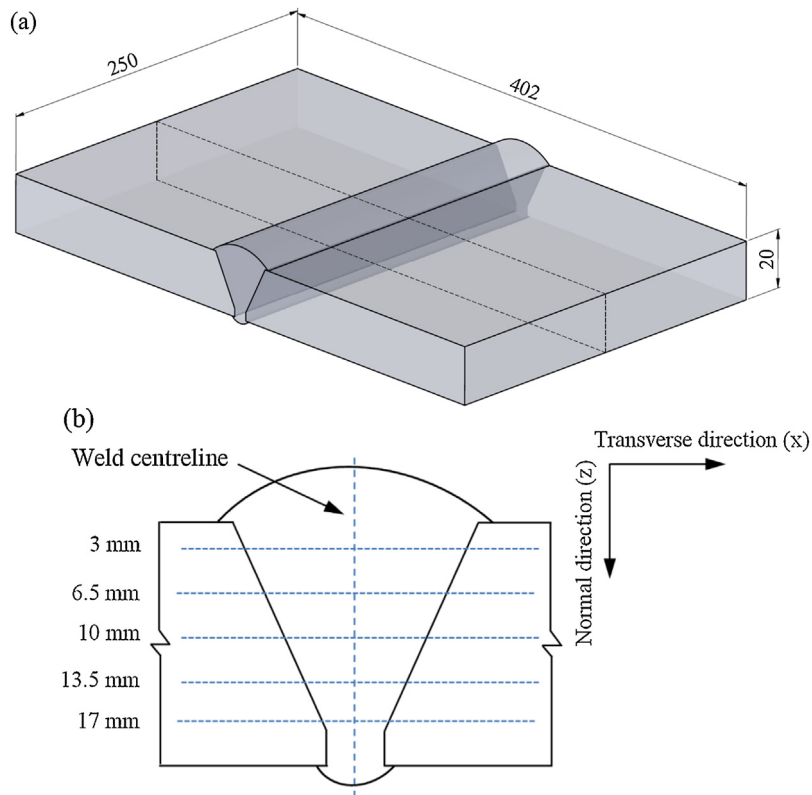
schematic of (a) weld cross section for residual stress measurements and (b) measurement points.
